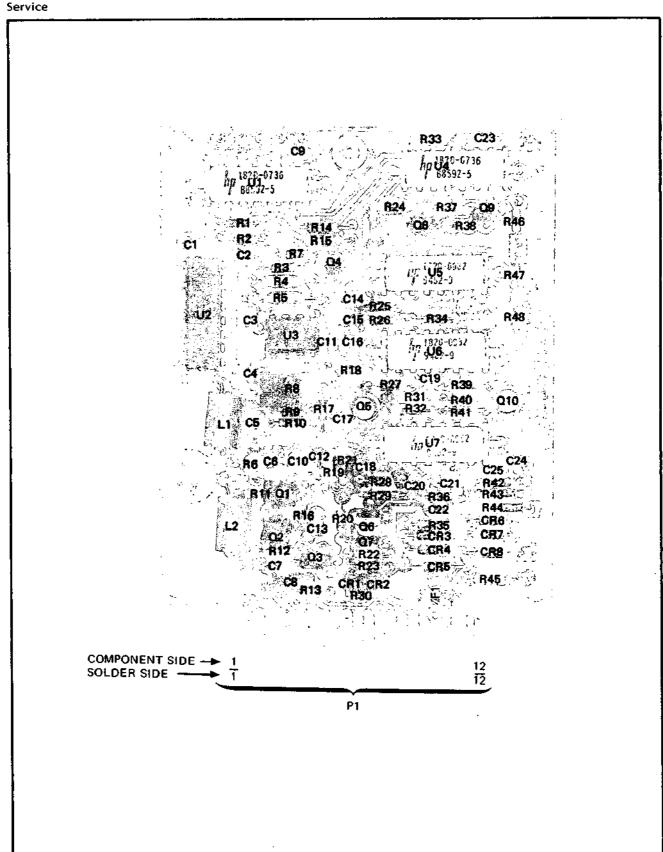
A1 Display Assembly and A2 Display Drive Assembly
